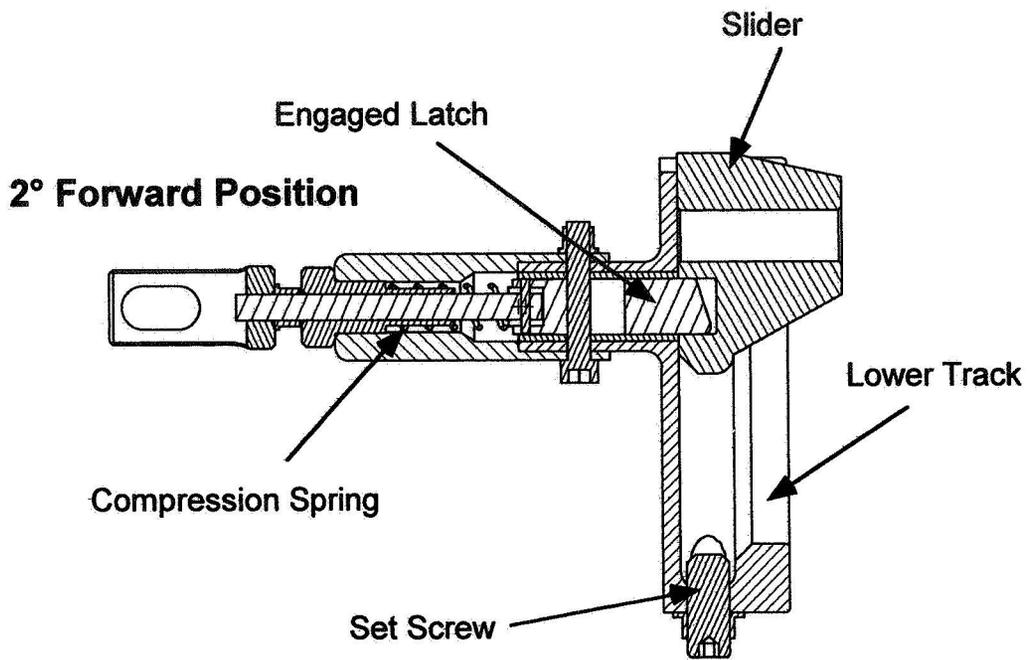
Lower Track Housing and Latch Cross Sectional Views - 2 Seat Back Angle Positions
